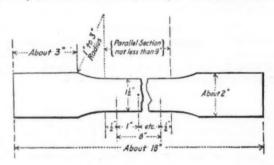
Standard Form of Test Specimen Required for all Tension Tests of Steel Plate of Flange Quality for Forge Welding
